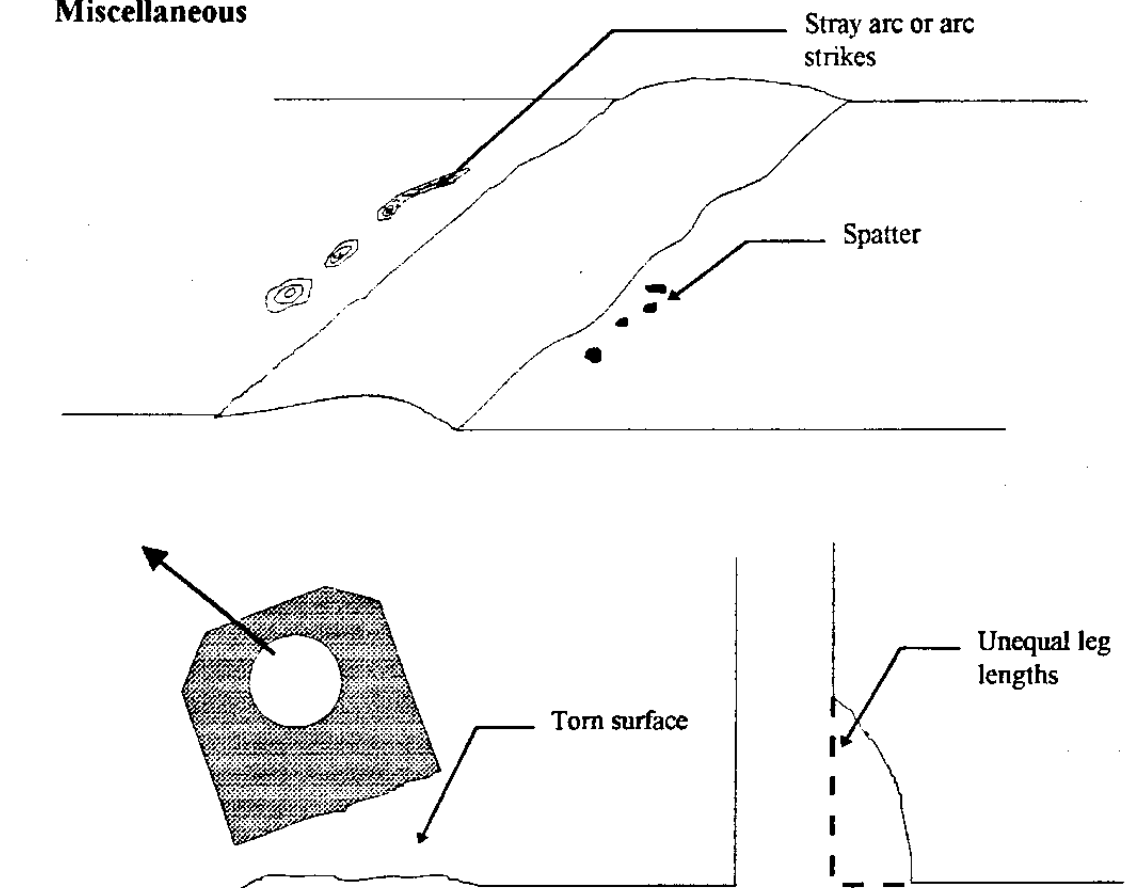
Weld Defects and Locations according to BS 499
